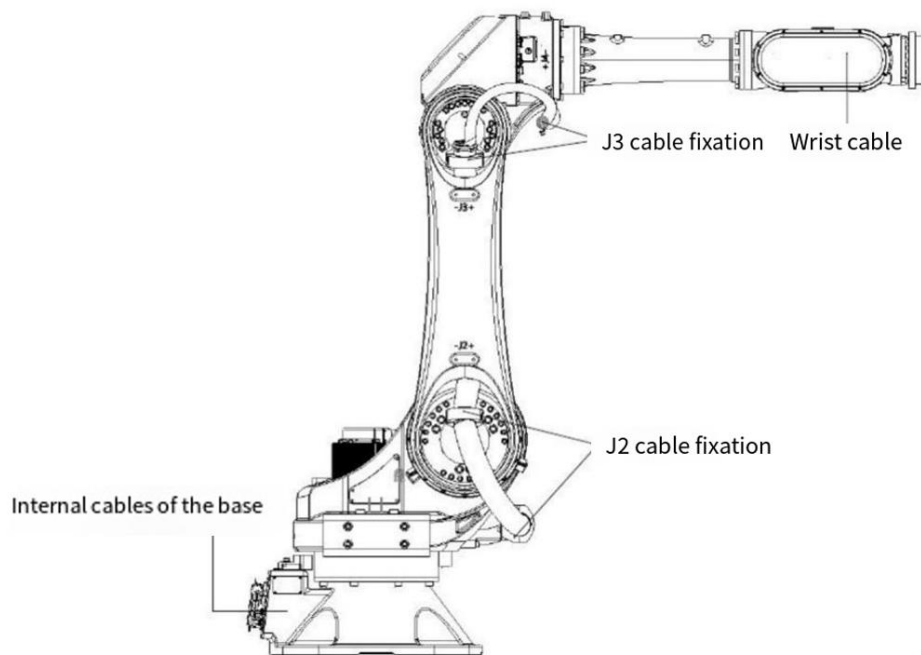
Cable Layout Diagram of RX3-A650-2700/RX3-A680-2560 Operator Console
